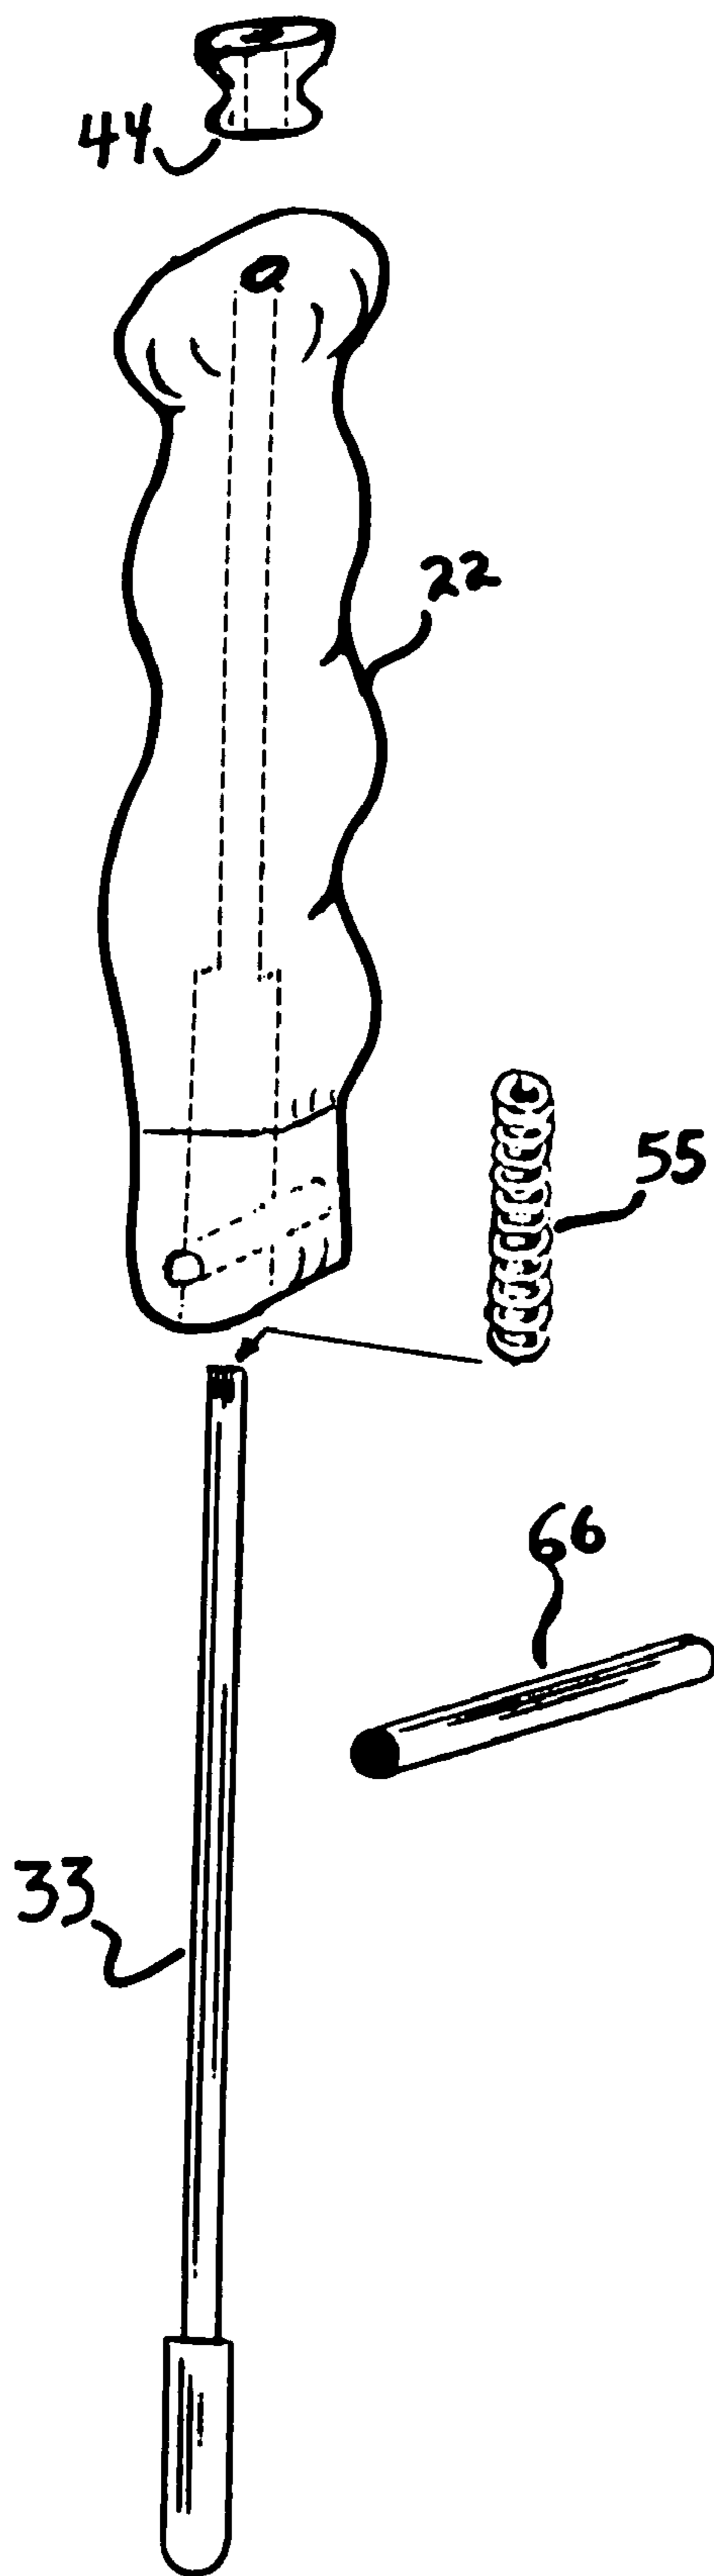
Exploded view of the *swivel handle 22* and the components:
